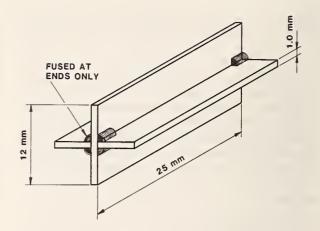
Cross-shaped divider. The divider, made from clear fused quartz microscope slides, is inserted into the header to keep the platinum expansion coils separated.
